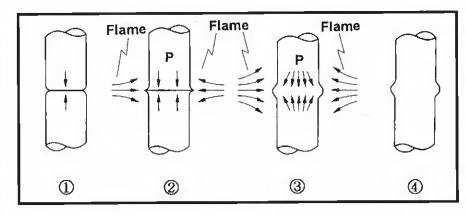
Illustration of the gas pressure welding procedure.
